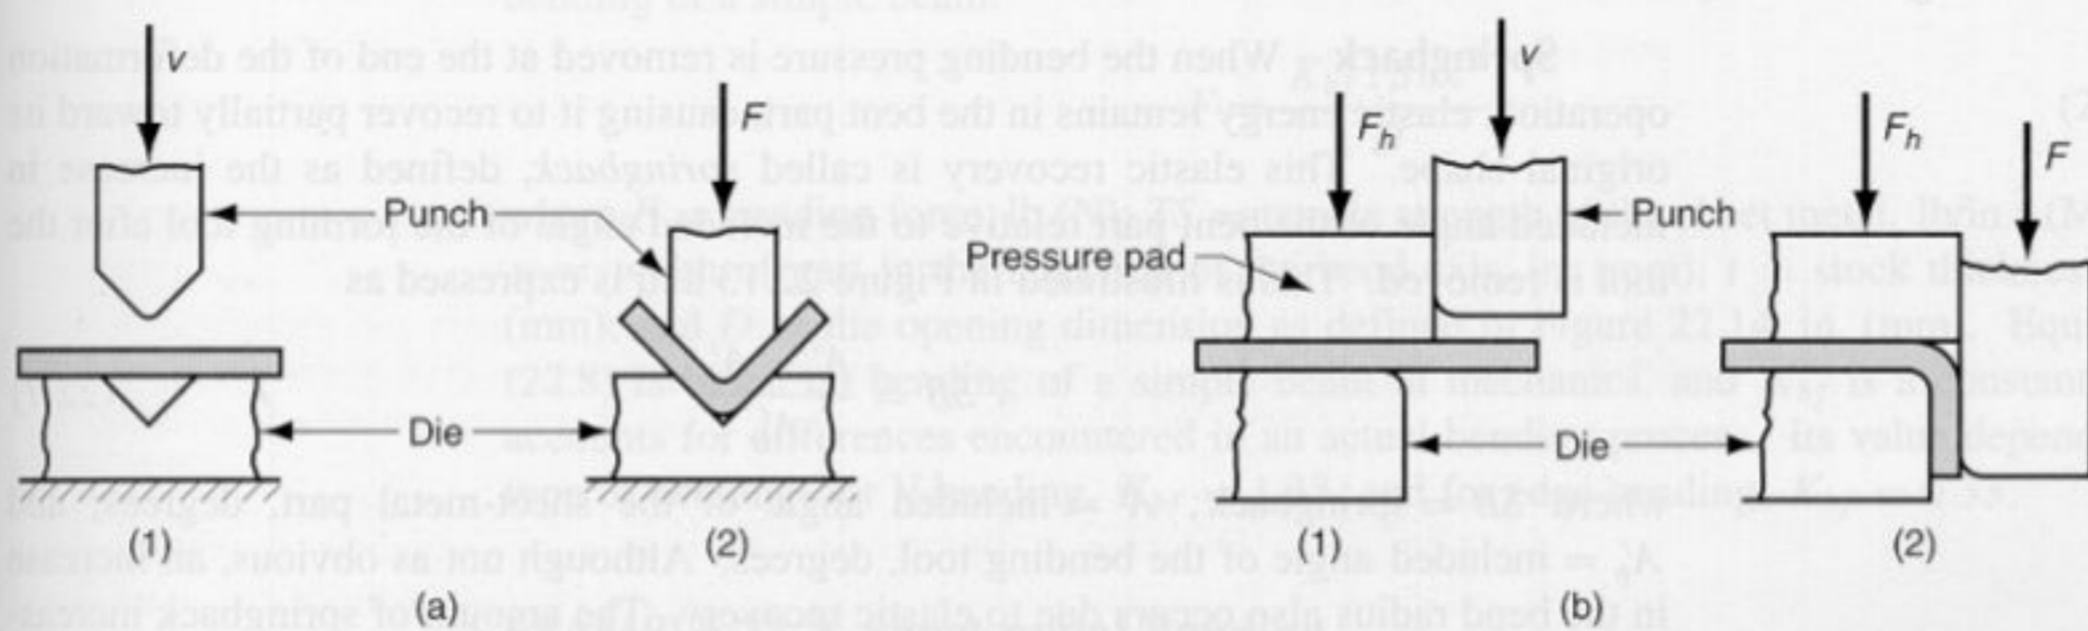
Two common bending methods: (a) V-bending and (b) edge bending; (1) before and (2) after bending. Symbols v = motion, F = applied bending force, F_h = holding force.
